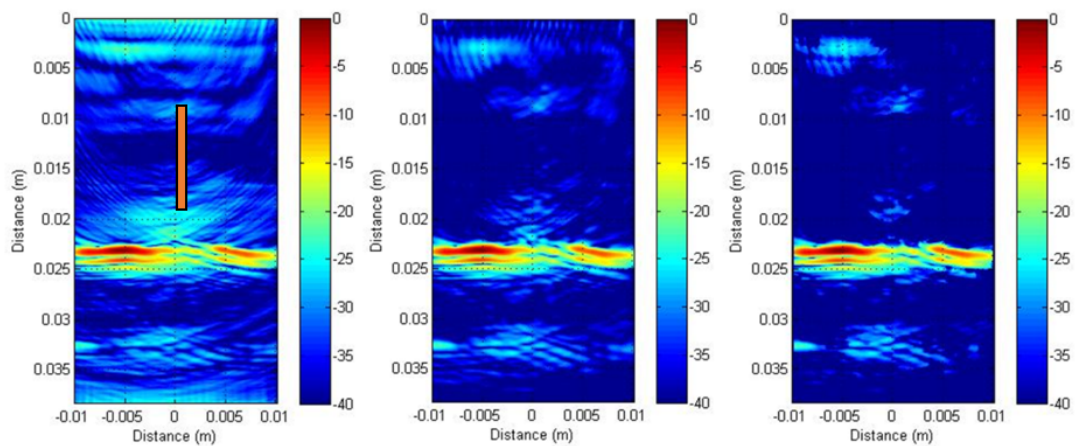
TFM, Filtered TFM and SASACI images of Flaw 4 within the stainless steel weld. Flaw 4 is a centreline crack propagating from the top of the weld. Although this defect is not visible in any of the three images, the effects of the crack can be seen as second and third reflections are visible at depths of 8mm and 16mm.
